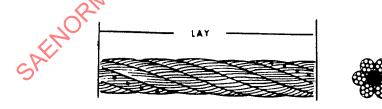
TYPICAL ROPE CONSTRUCTION
